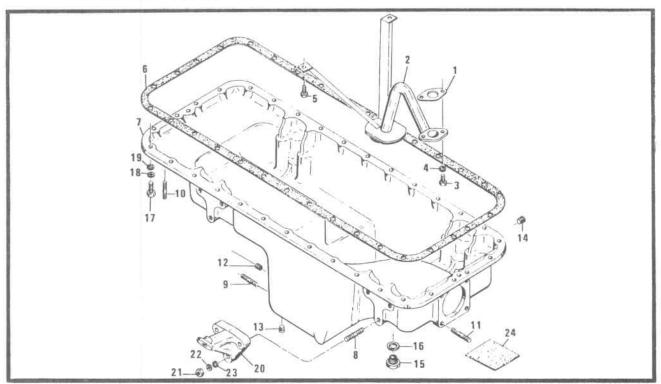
A. OIL SUMP (IO-470-C,H,J & N).
